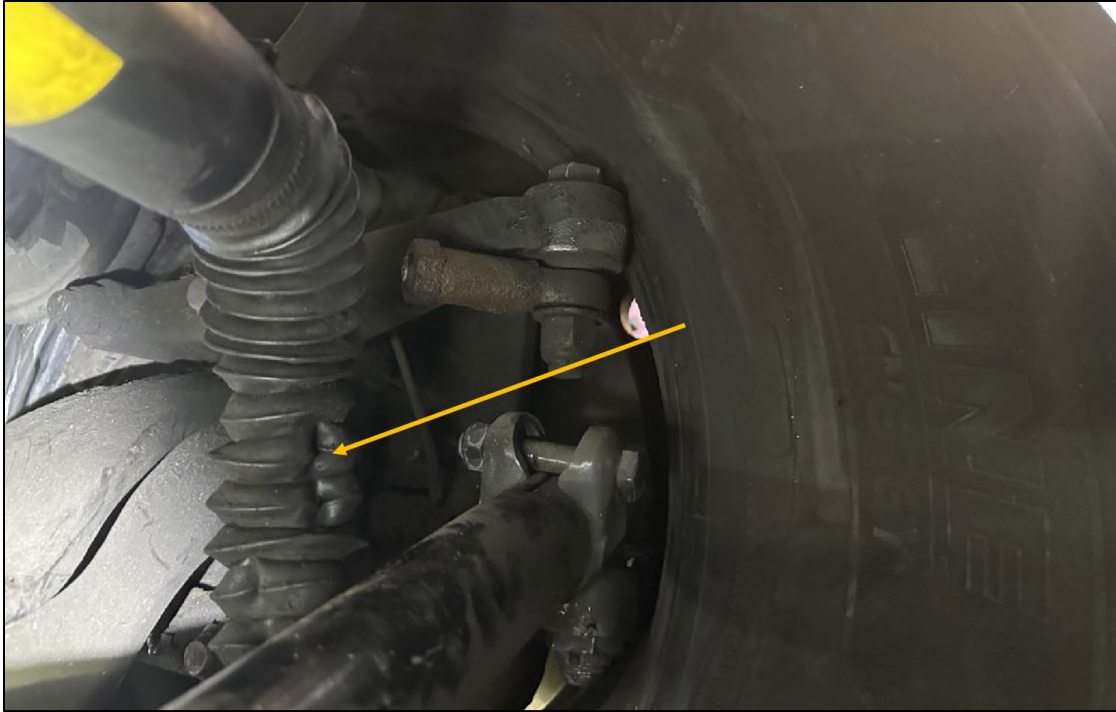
Motorcoach - Tear in Damper Boot and Missing Component
